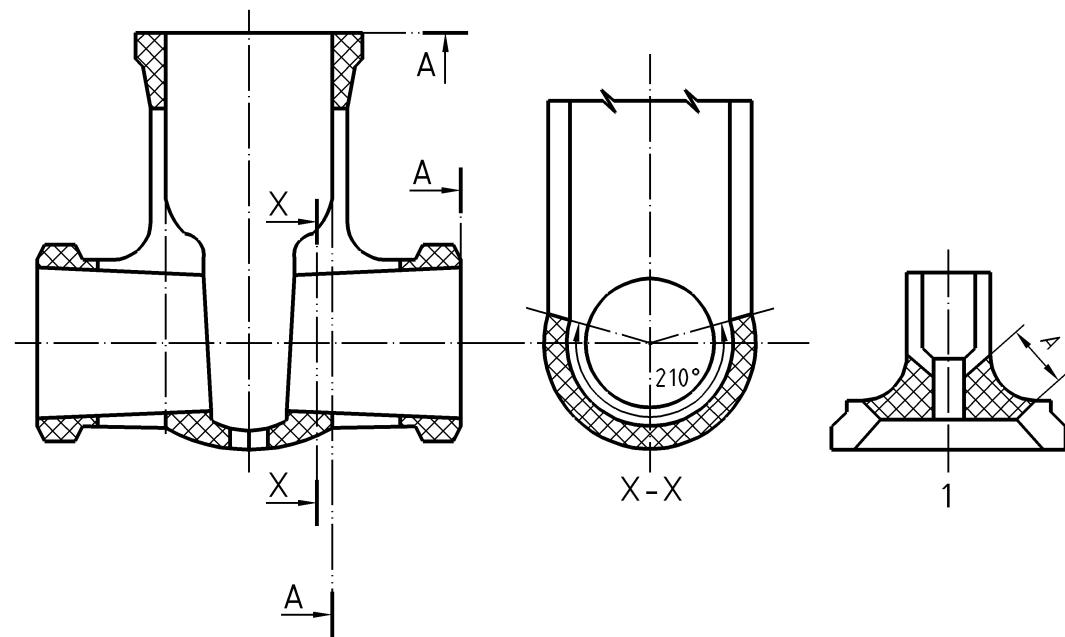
Typical casting section showing required radiographic examination of gate valve body and bonnet (pressure seal bonnet)
